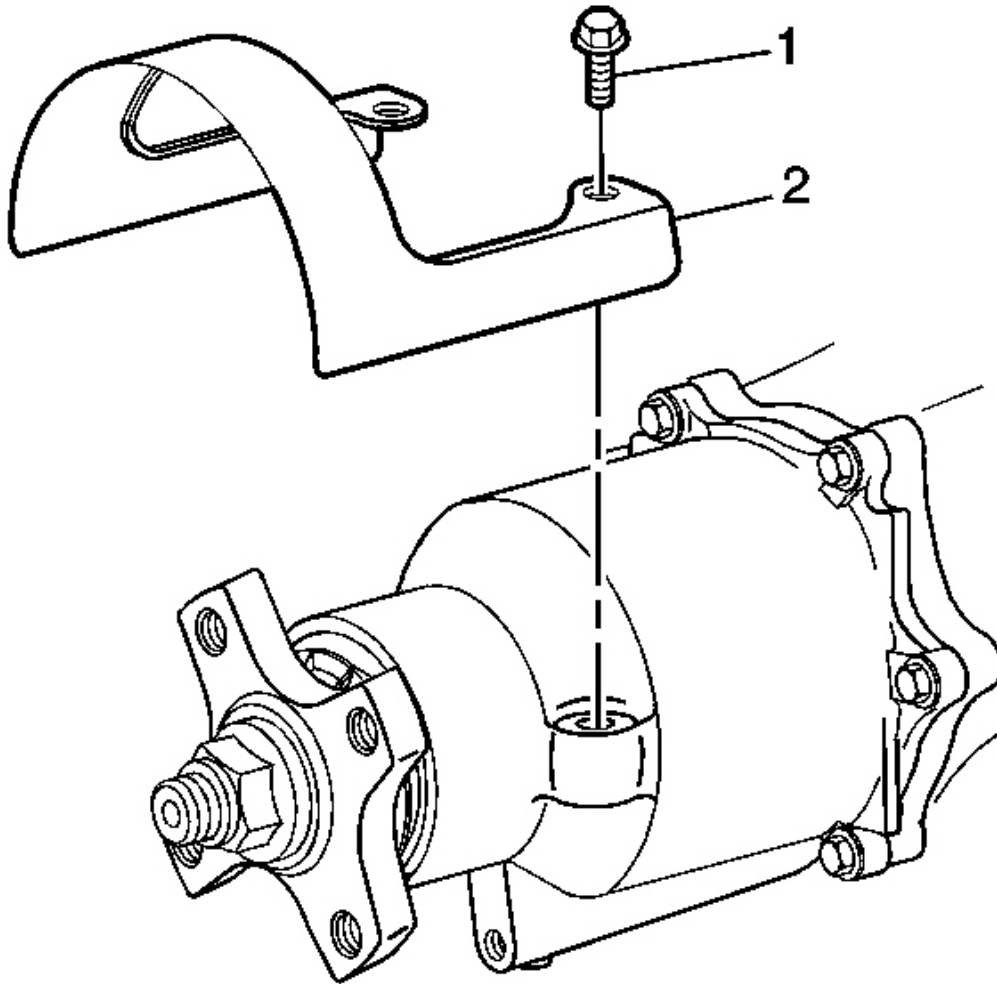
Removing/Installing Propeller Shaft Shield On RDM
